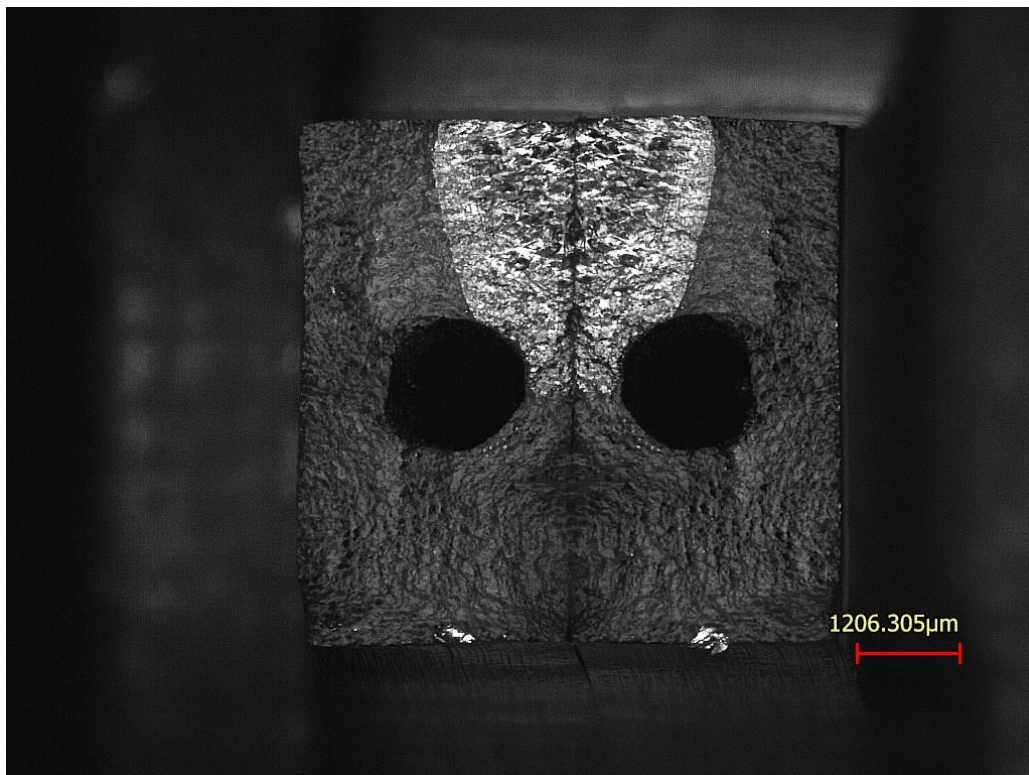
Specimen C3 fracture surface (700,000 cycles : 63.62 ksi / 438.6 MPa)
